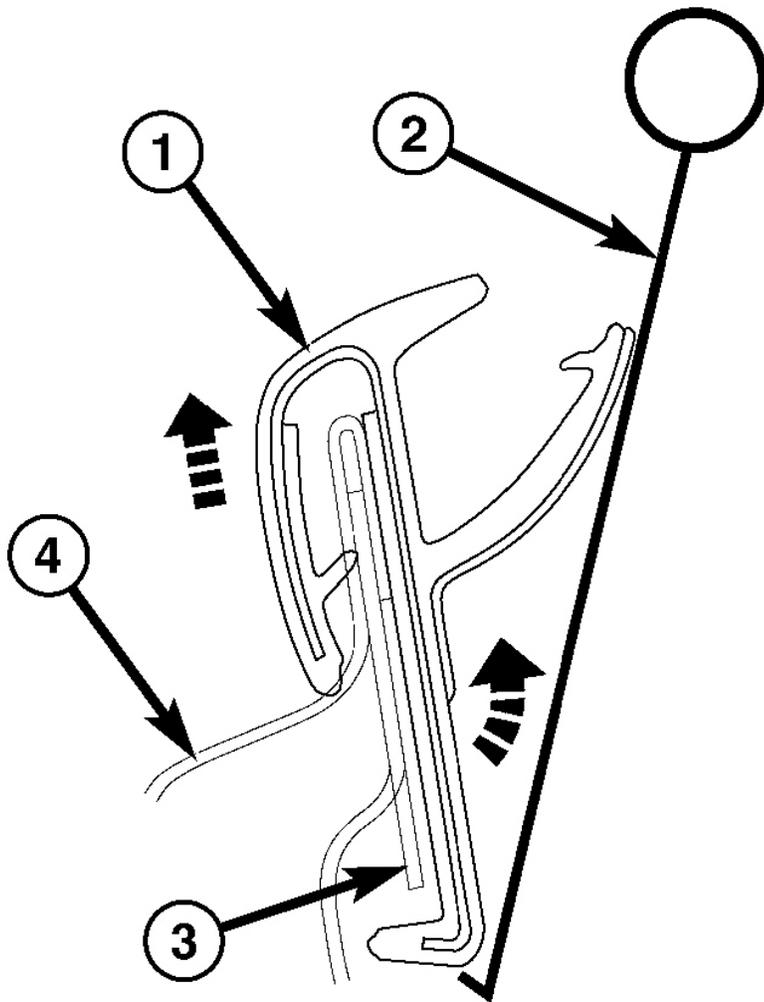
Removing/Installing Inner Belt Molding Outboard
